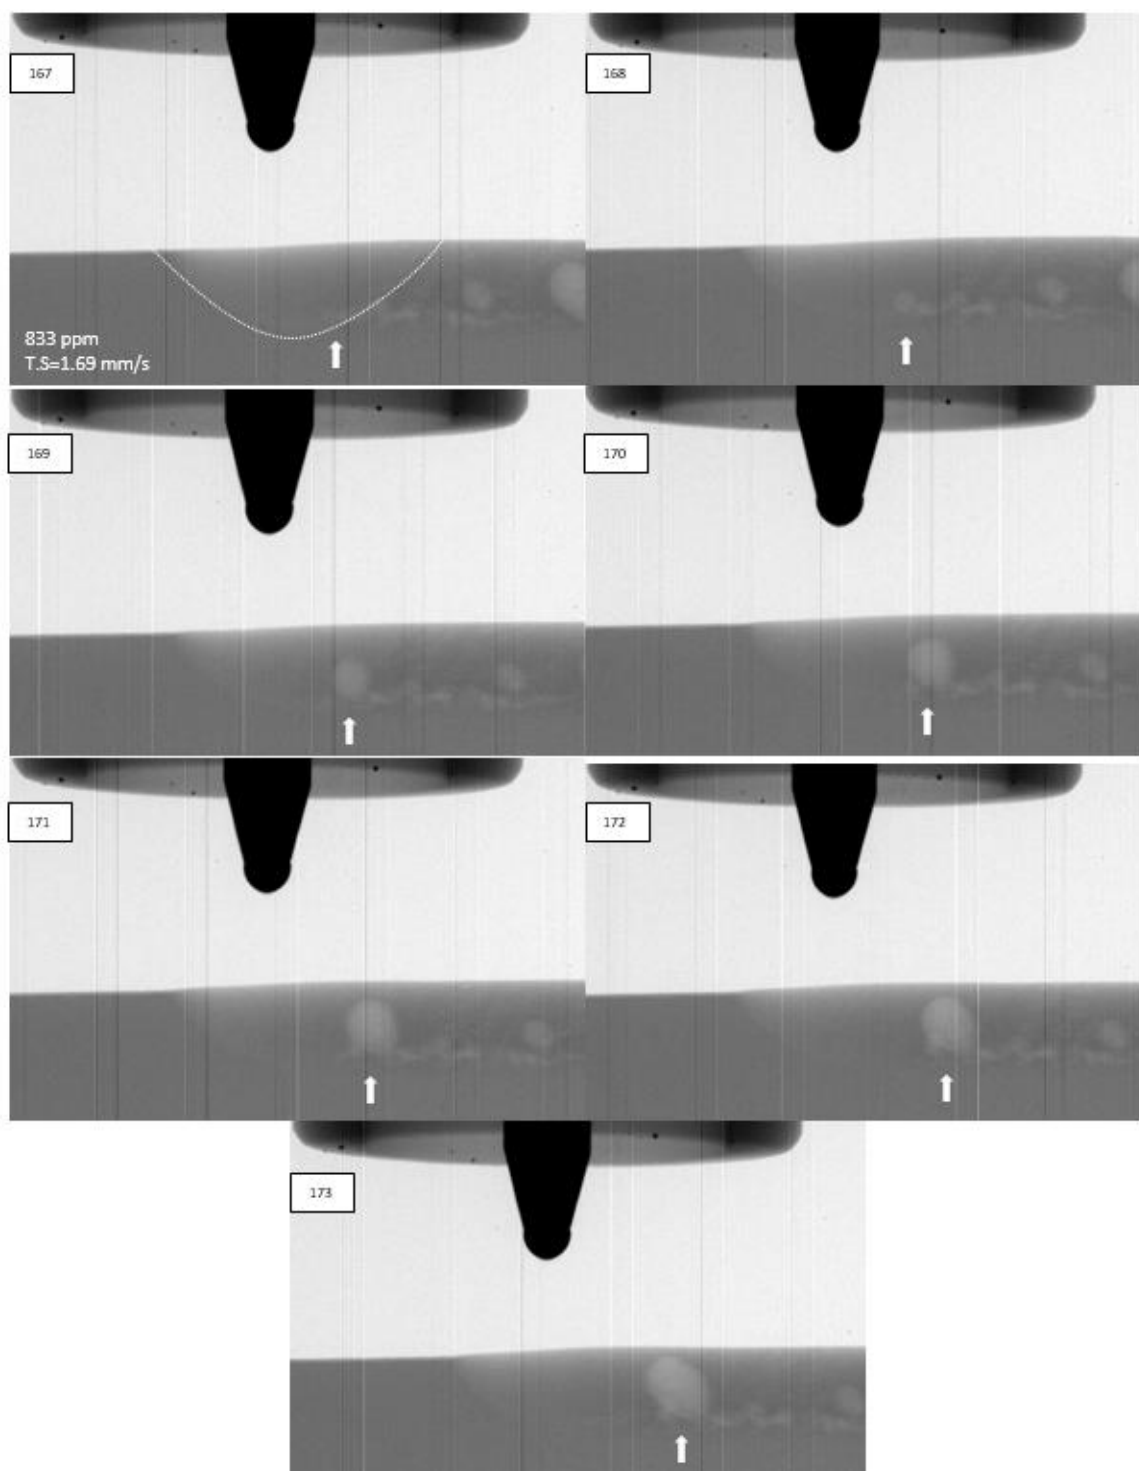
Alloy 1100 welded using 833 ppm of shielding gas hydrogen at 1.69 mm/s.
